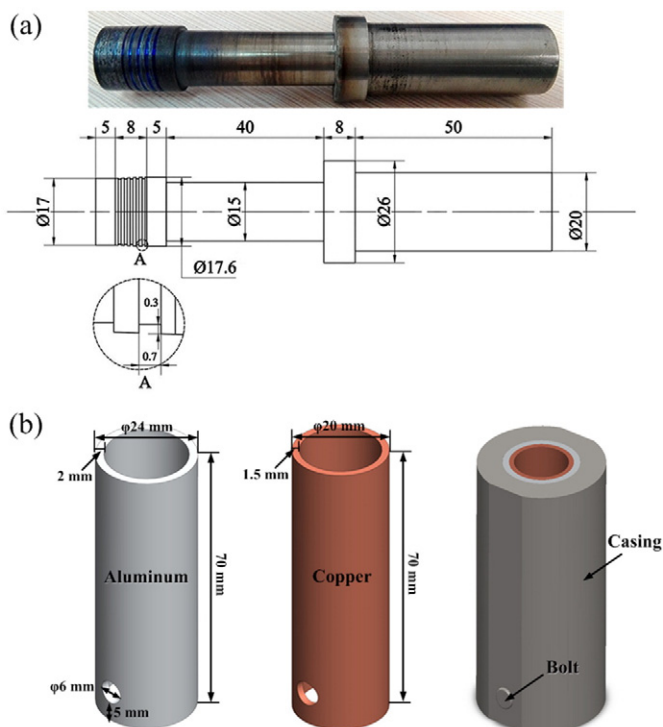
(a) The welding tool, and (b) the assembled conditions of tubes.
